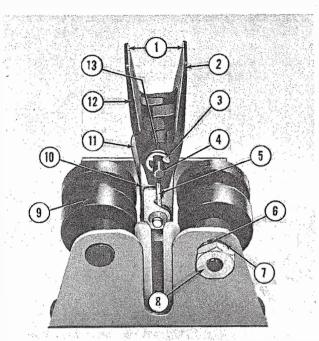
BRACKET AND ROLLER ASSEMBLY, LIFT ARM GUIDE, 2400
